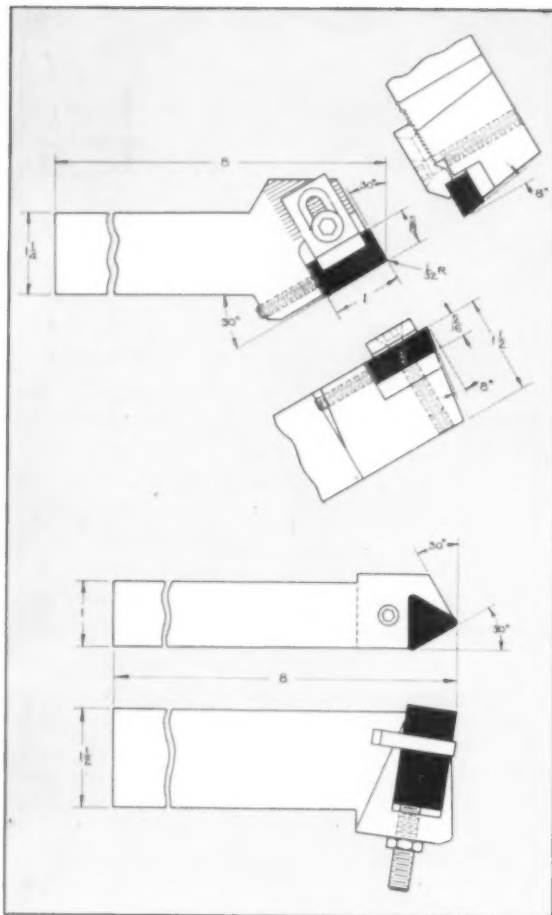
Mechanically held tools are efficient for rough turning small shells. At the top is a Mechaniclampt tool, bottom, a Mechanigript tool.
